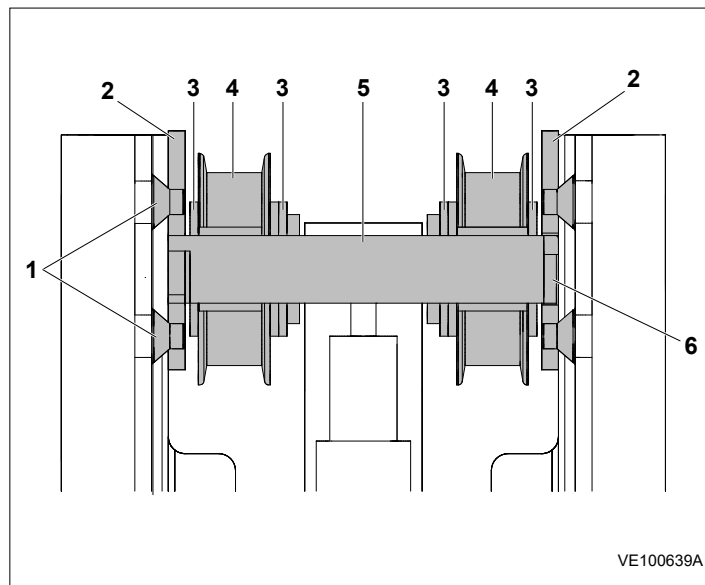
Install Chain/Anchor Block to Top of Lift Cylinder
